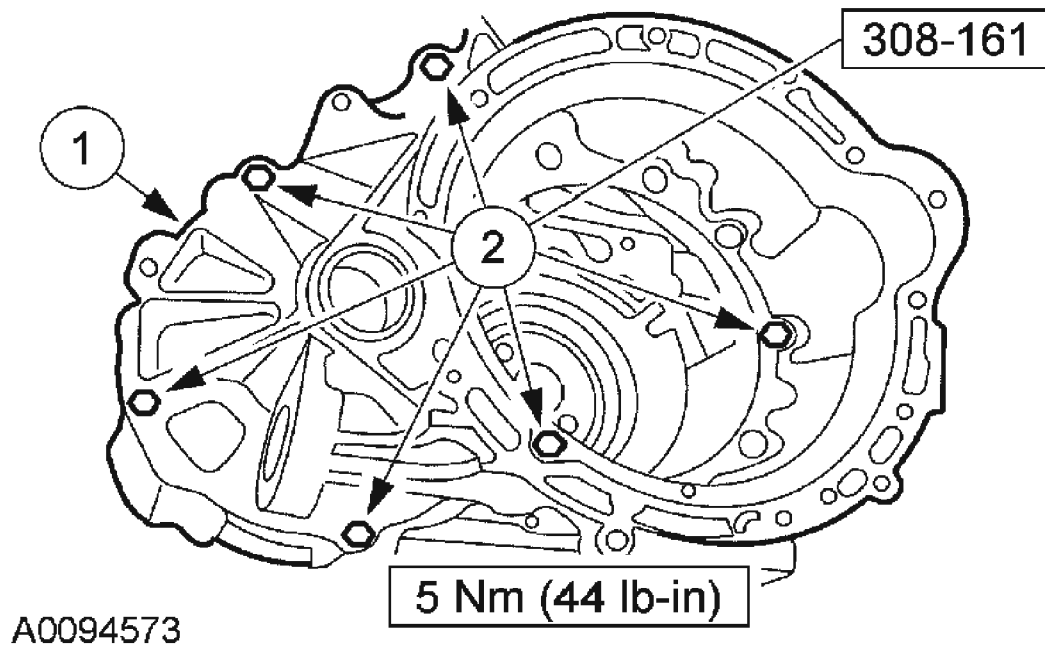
Assembling Transaxle For End Play Measurement Using Special Tools
